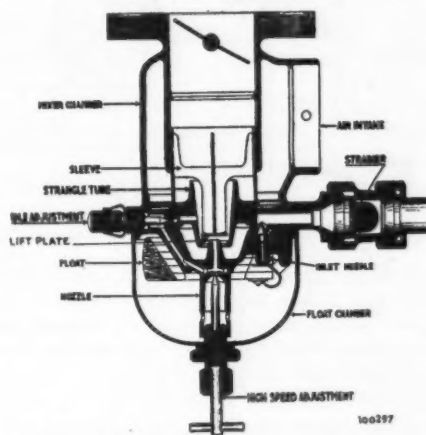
Model A Johnson carbureter used on the 1917 Oldsmobile 45
